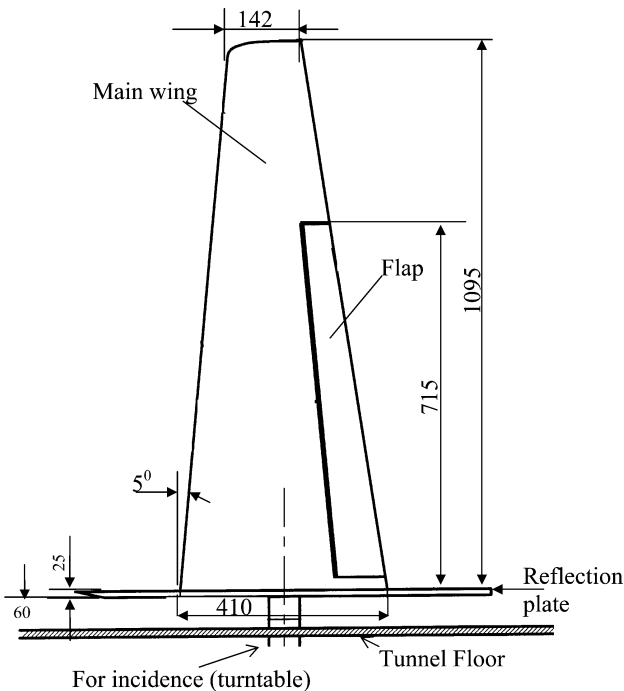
Geometric details of wing model (all dimensions in millimeters).
